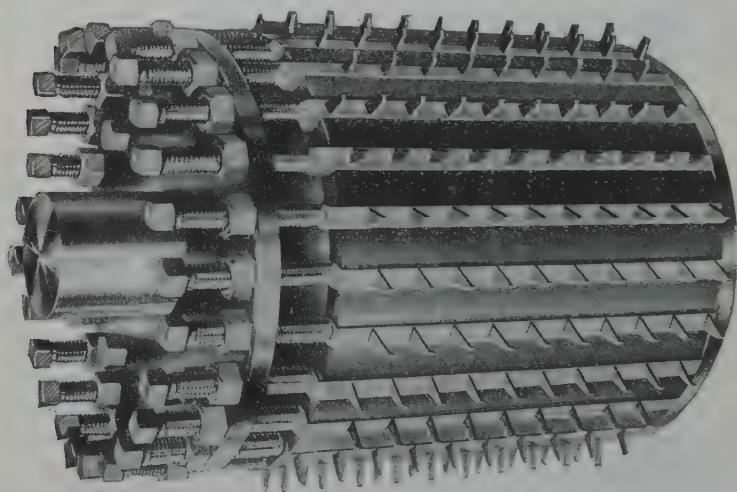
VIEW OF ONE OF THE FOUR DRUMS OF THE GREENLEE PERFORATING MACHINE.
